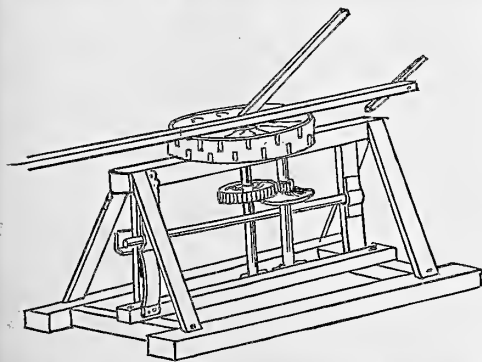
A "MOWING MACHINE HORSE POWER."
